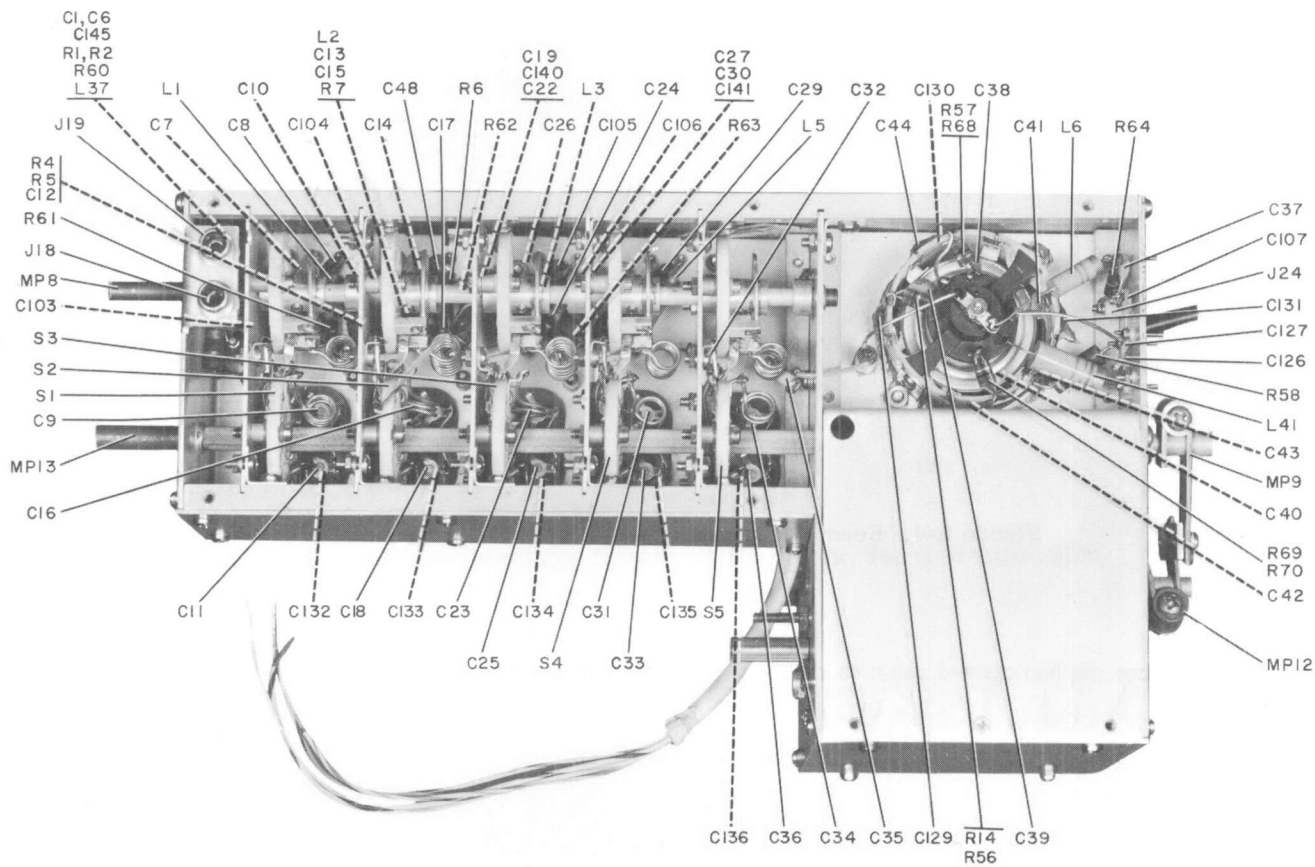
Transmitter Subunit, Bottom View, Parts Identification
